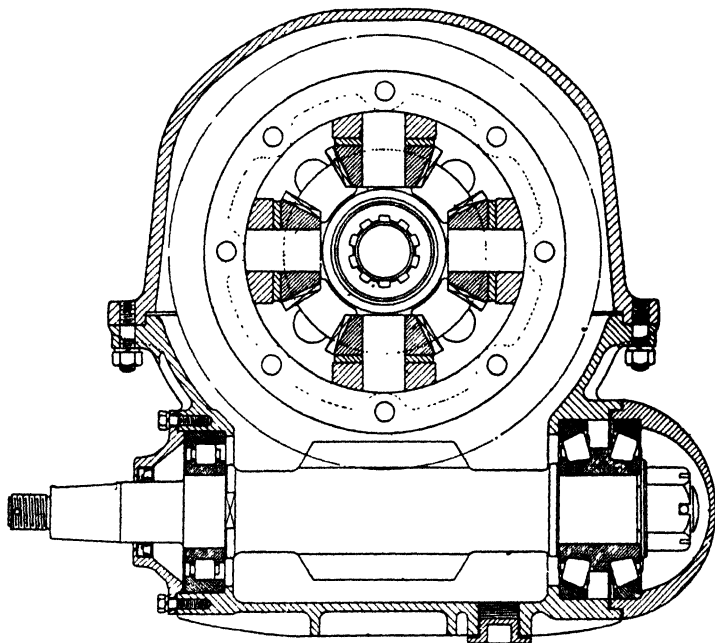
GUY BUS-DRIVE WORM GEAR, SECTION ON WORM AXIS.
